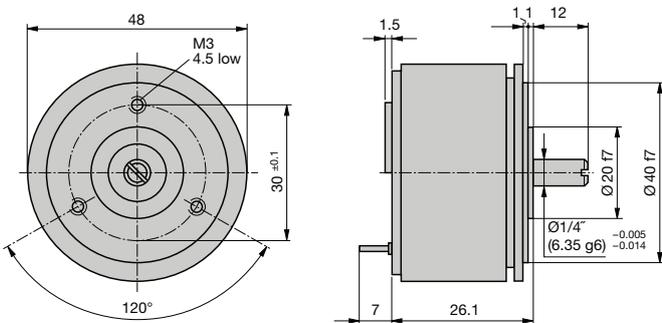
KINAX 2W2 with special drive shaft at front only,
